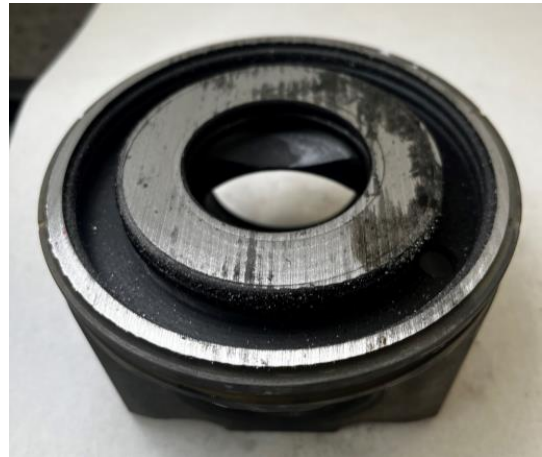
Cross sectional view of piston 14 top part of cooling gallery after cleaning.
